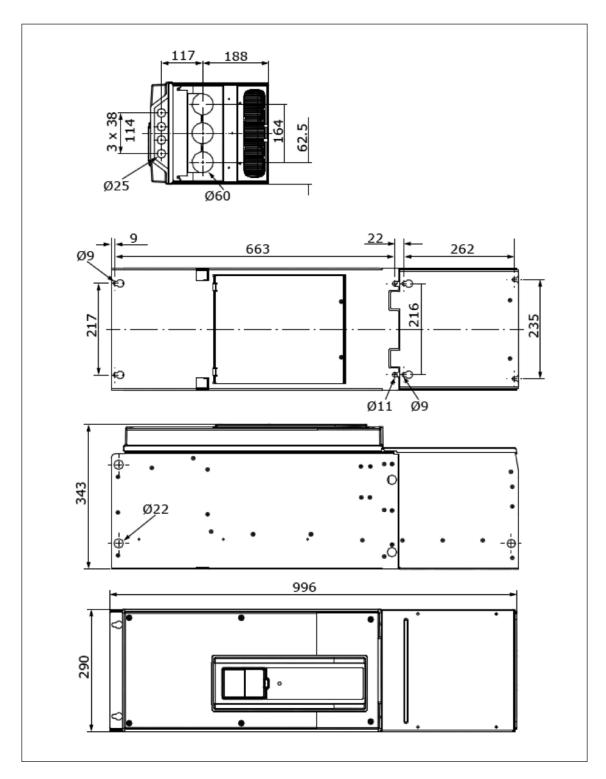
The dimensions of the AC drive, MR8, IP21 and IP54
